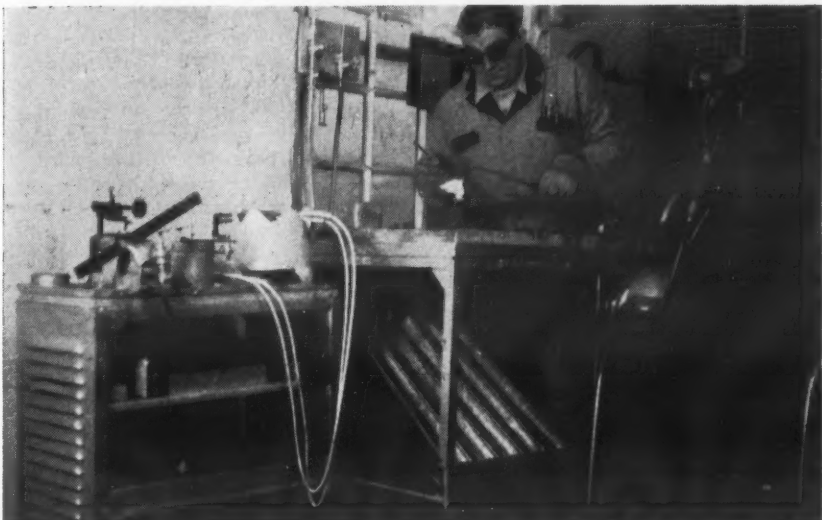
Silver soldering and electric welding are done at the movable soldering bench, shown above. The equipment is connected to gas and air lines at different points in the shop. Brazing rods are held on the slanting rack under the stand.
